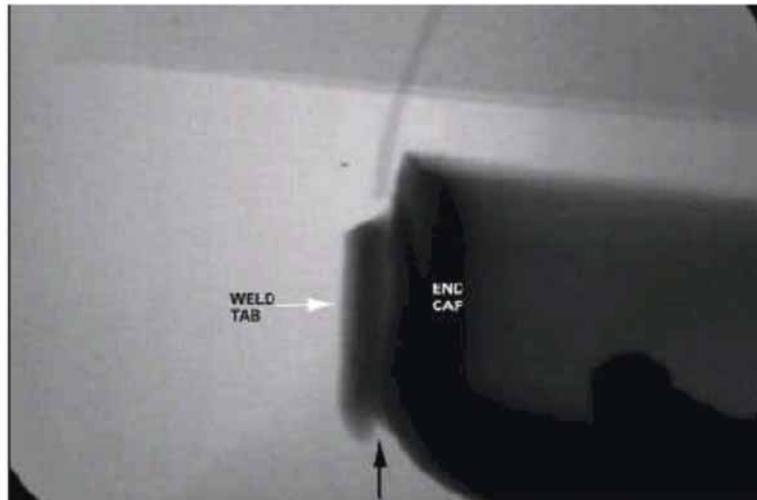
Enlarged x-ray view showing the open between the resistor wire and the end cap.
